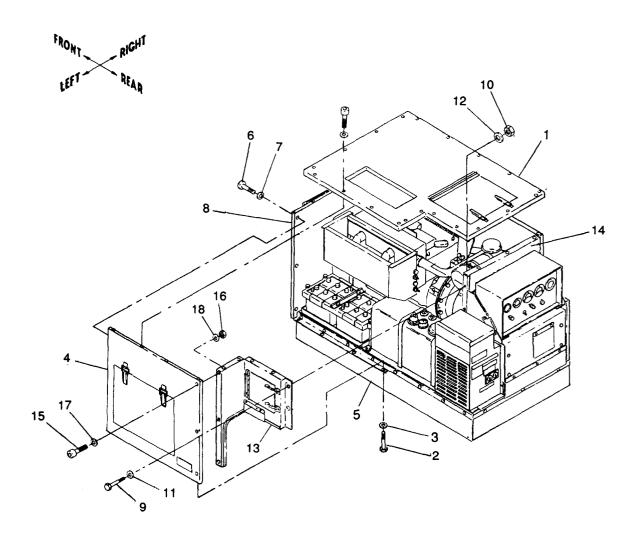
Left Panel Assembly and Side Closure Assembly, Removal and Installation
